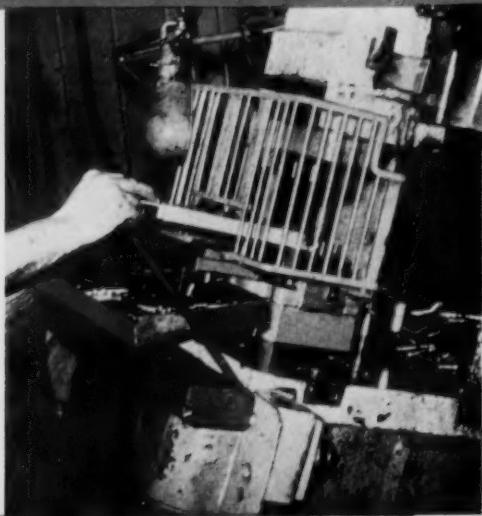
Shown is a progressive slide feed where one part pushes the forward part into position; then finished part is ejected by air, thereby making ready for next part.
